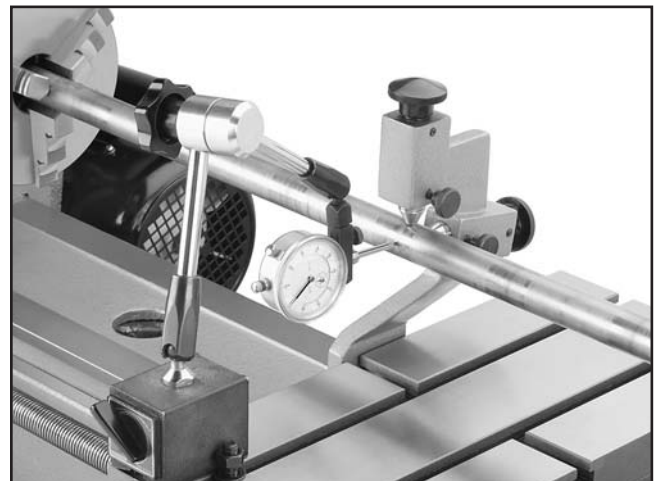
Adjusting the brass finger with a test indicator (for clarity, shown without tailstock center supporting the workpiece).
